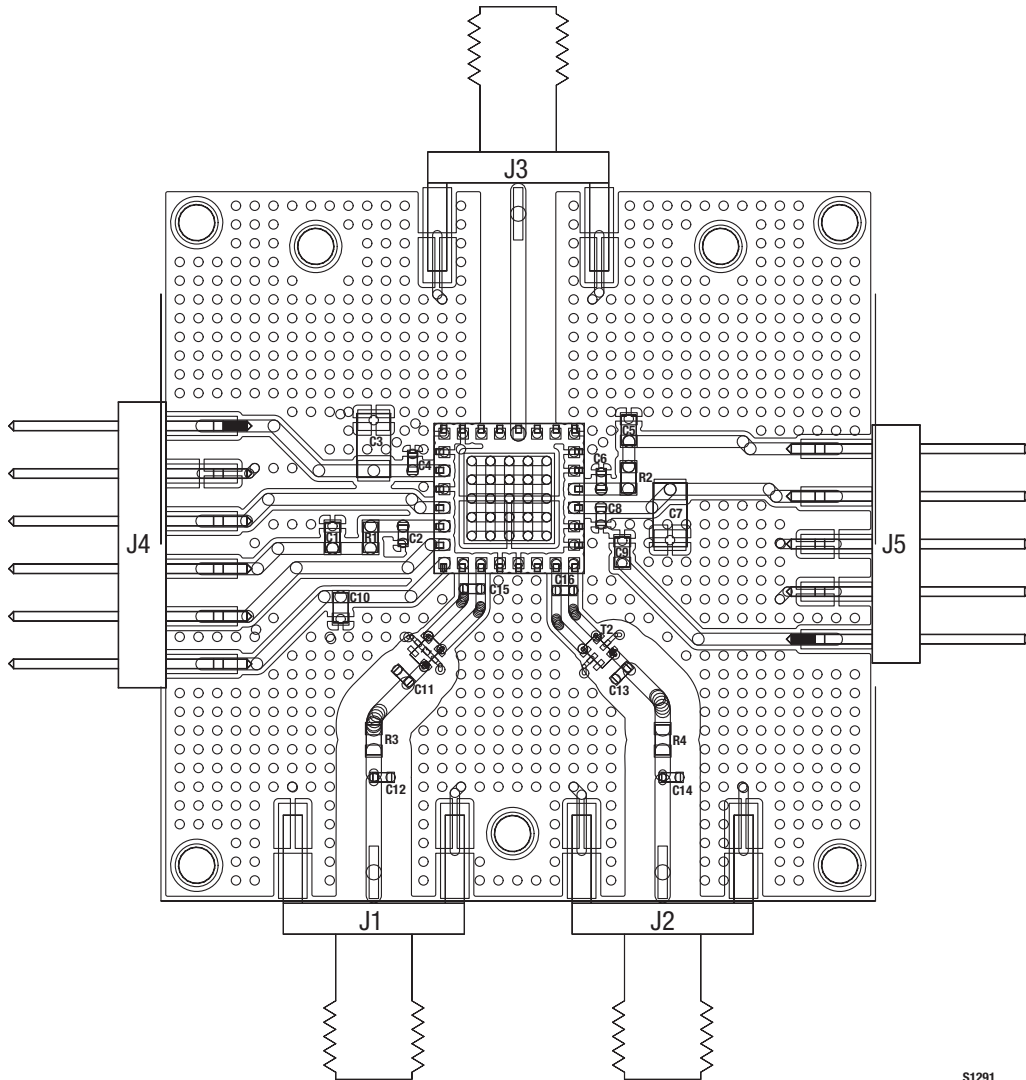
SKY65336-11 Evaluation Board Assembly Drawing
